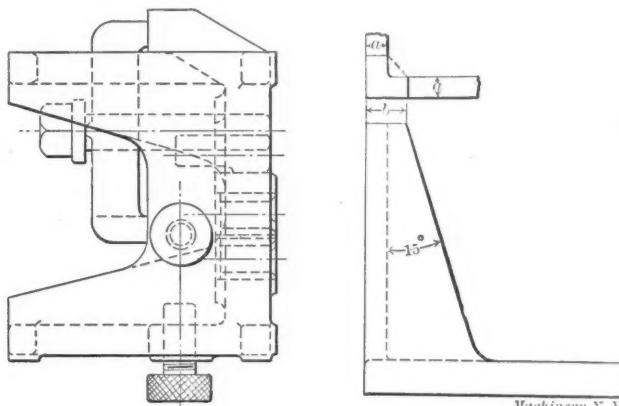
Design of Legs for Cast Iron Jig Bodies.
